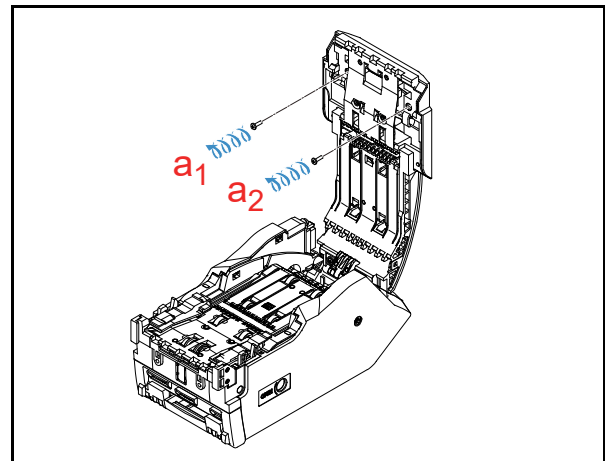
LED Light Module and Upper Barcode Sensor Removal 1
